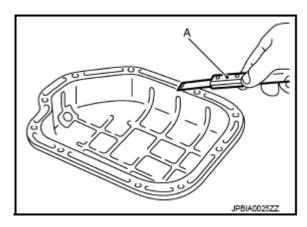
Removing Old Liquid Gasket From Mating Surfaces Using Scraper Courtesy of NISSAN NORTH AMERICA, INC.
